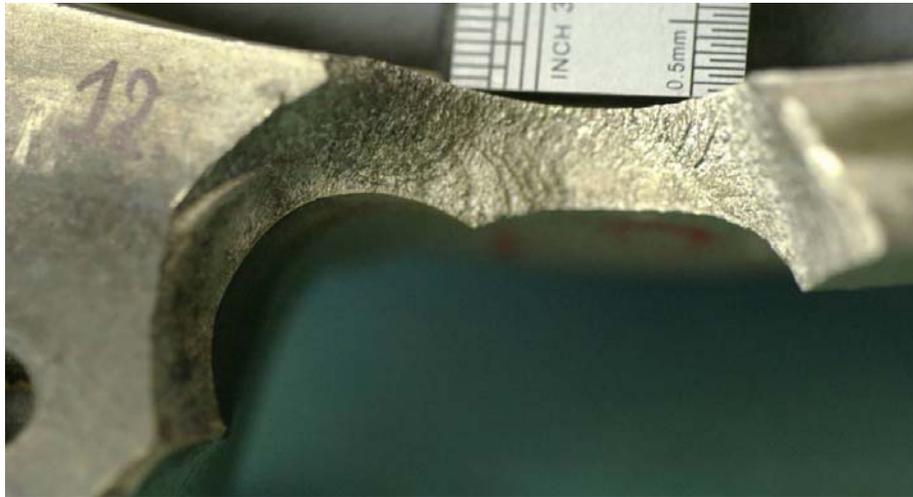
&b View of opposing fracture surfaces in lug 12.
